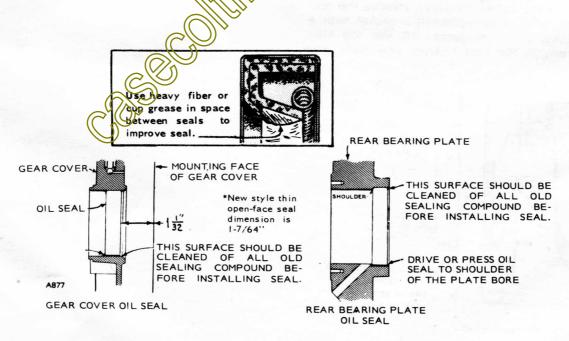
GEAR COVER AND REAR BEARING PLATE OIL SEALS
